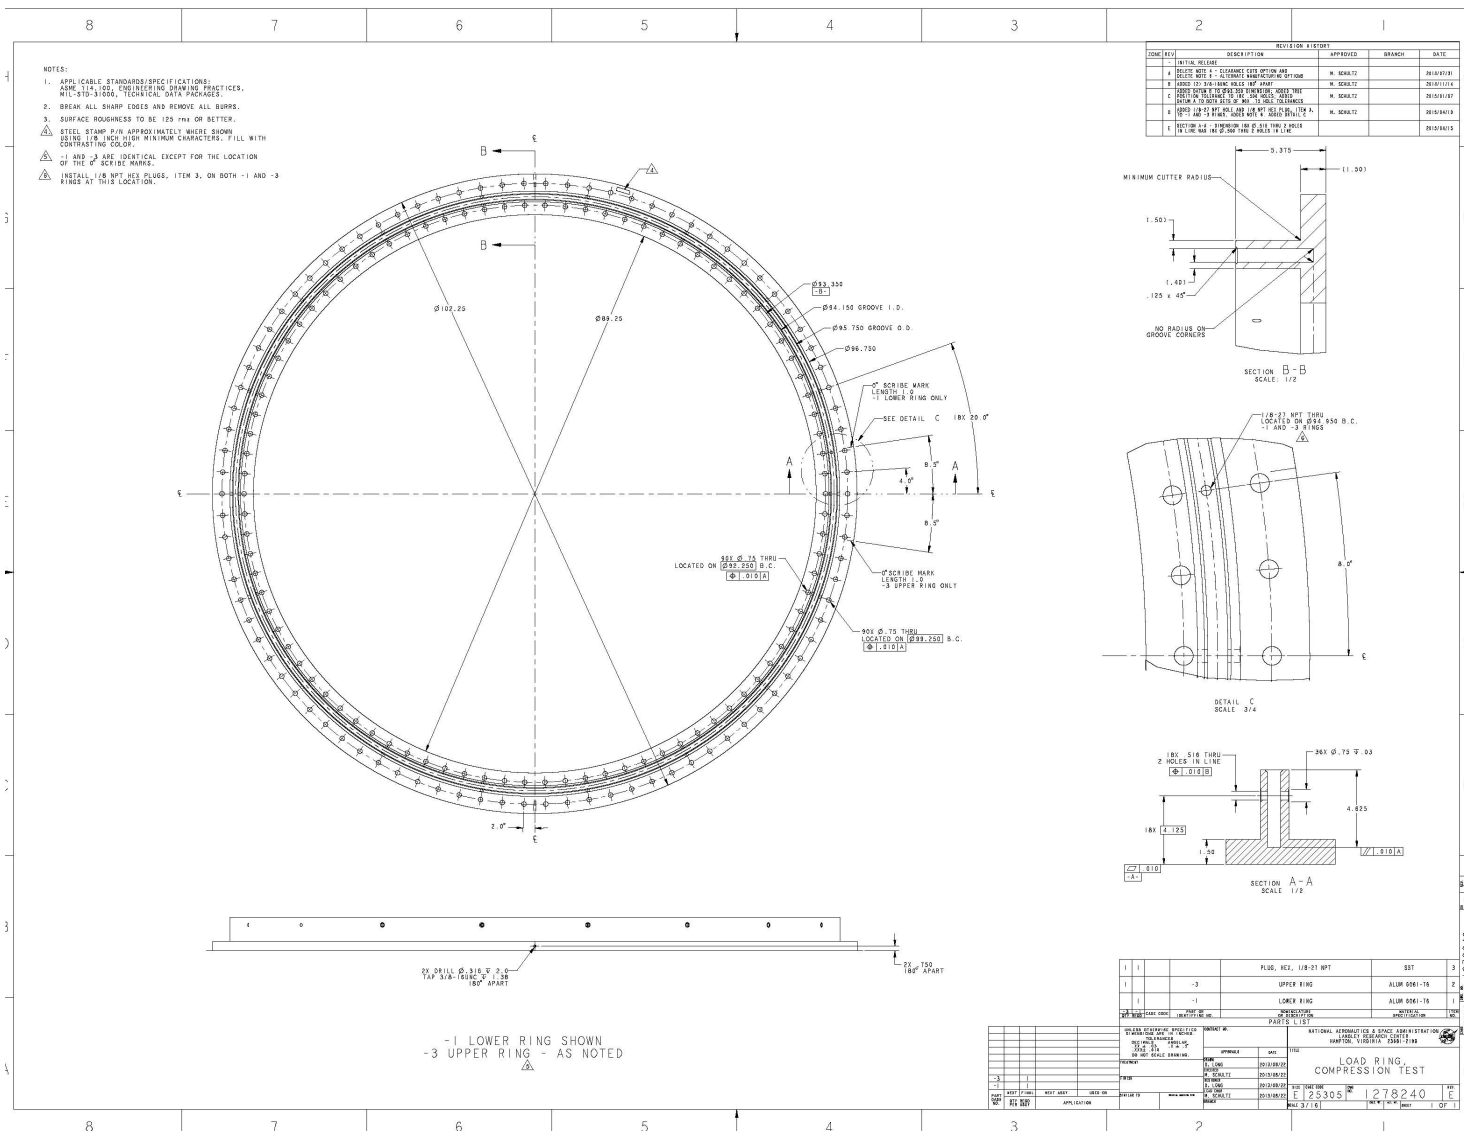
Test-article attachment ring design, LaRC Drawing 1278240 Rev. E.
